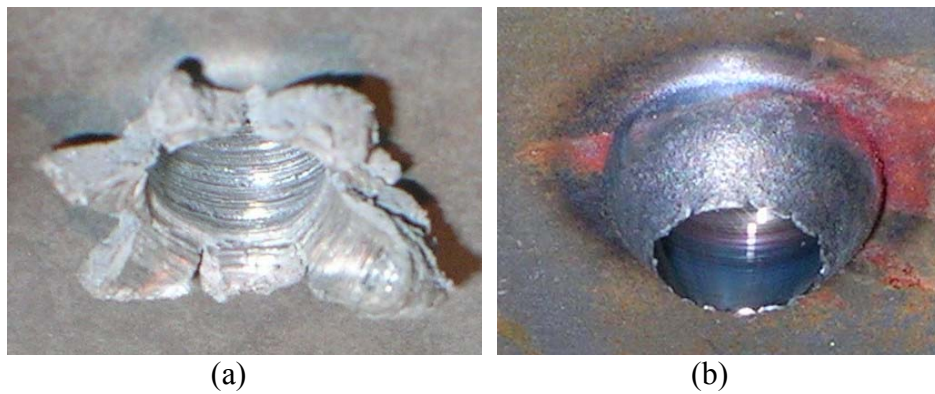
Bushing of friction drilled hole using 5.3 mm diameter tool: (a) cast Al380 at 5500 rpm with petal formation and bushing fraction and (b) AISI 1020 carbon steel at 2500 rpm.
